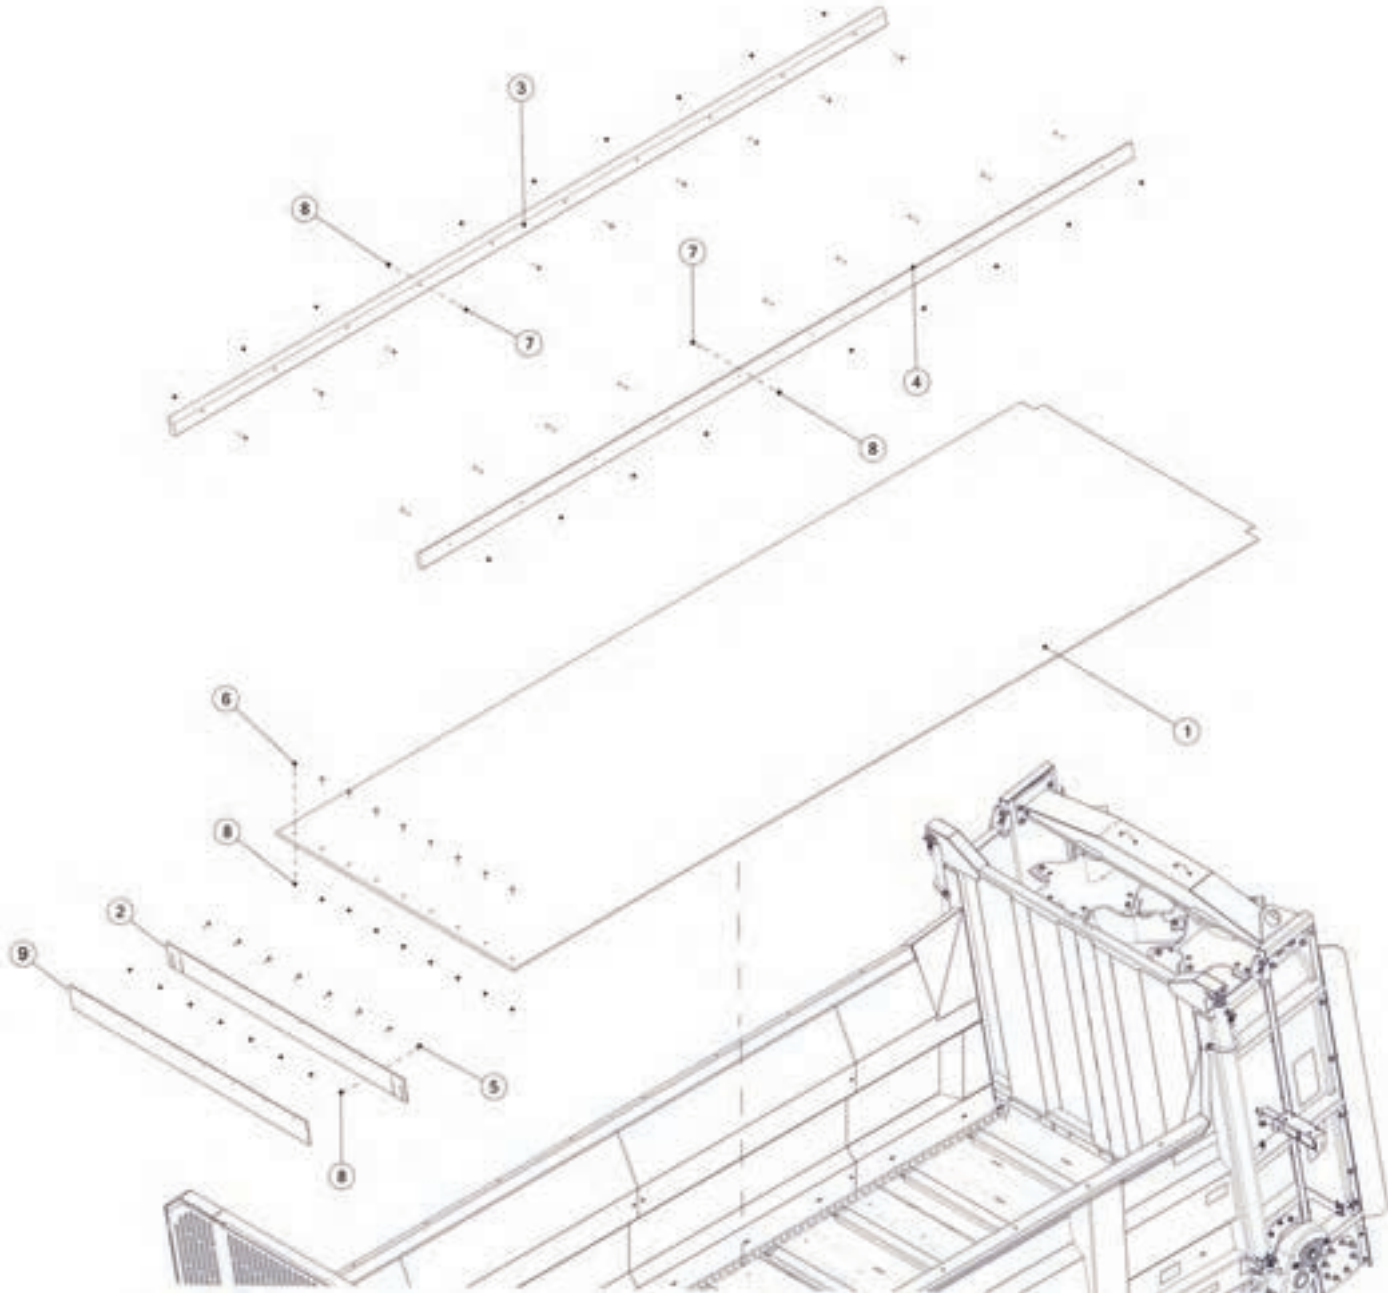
FRONT APRON SHIELD & COMPONENTS
